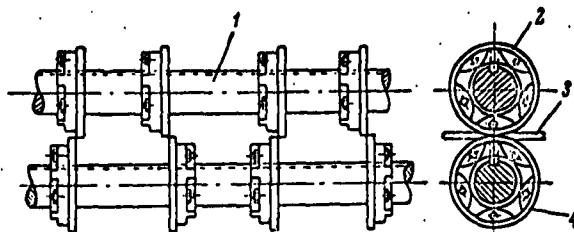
Diagram of disk shears. 1) Shaft; 2) upper disk blade; 3) material to be cut; 4) lower disk blade.
